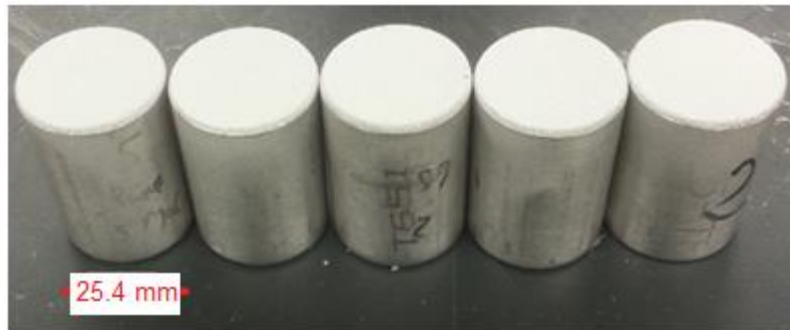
Pure aluminum coatings produced on aluminum 7075-T6 bond plugs
